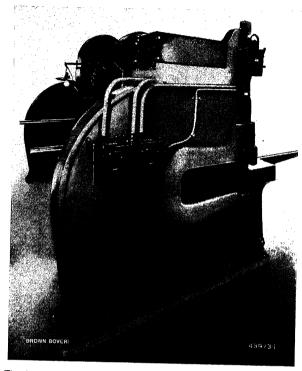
Shears with built-on three-phase flange motor of slip-ring type and contactor control built on to the machine.
